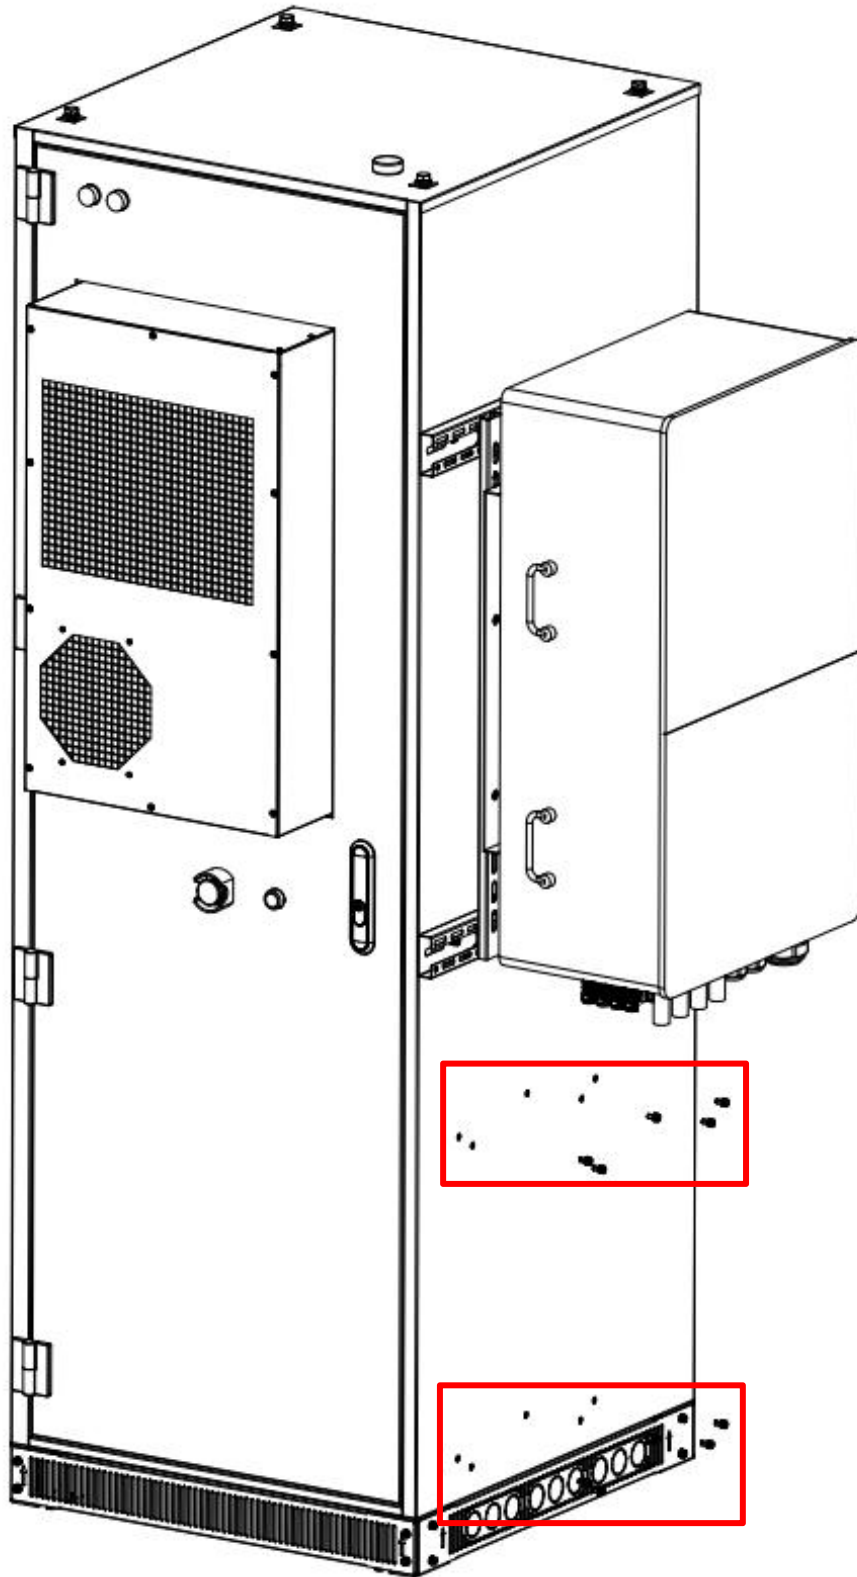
Remove the fastening screws from the cabinet body.
